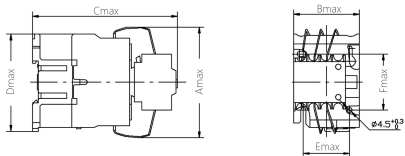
Outline and installation dimensions of CJ19-25~43 contactors
